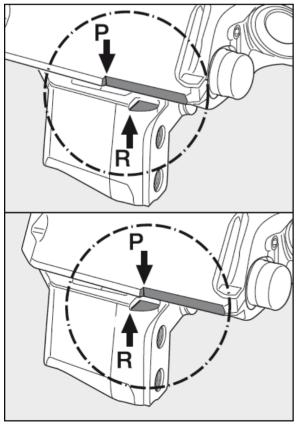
PAD WEAR CHECK FRONT AND TAG AXLE
